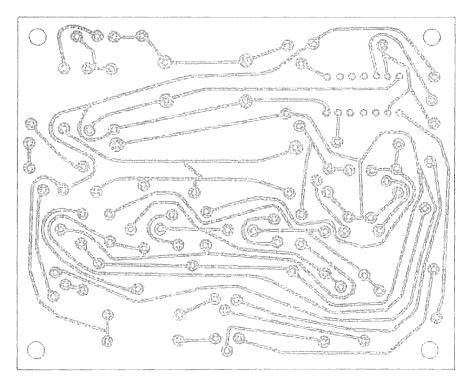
Flop the drawing over; the marking pen outline of the traces will show through the paper.
